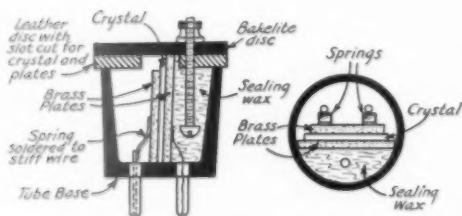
CRYSTAL HOLDER MADE FROM AN OLD TUBE BASE
